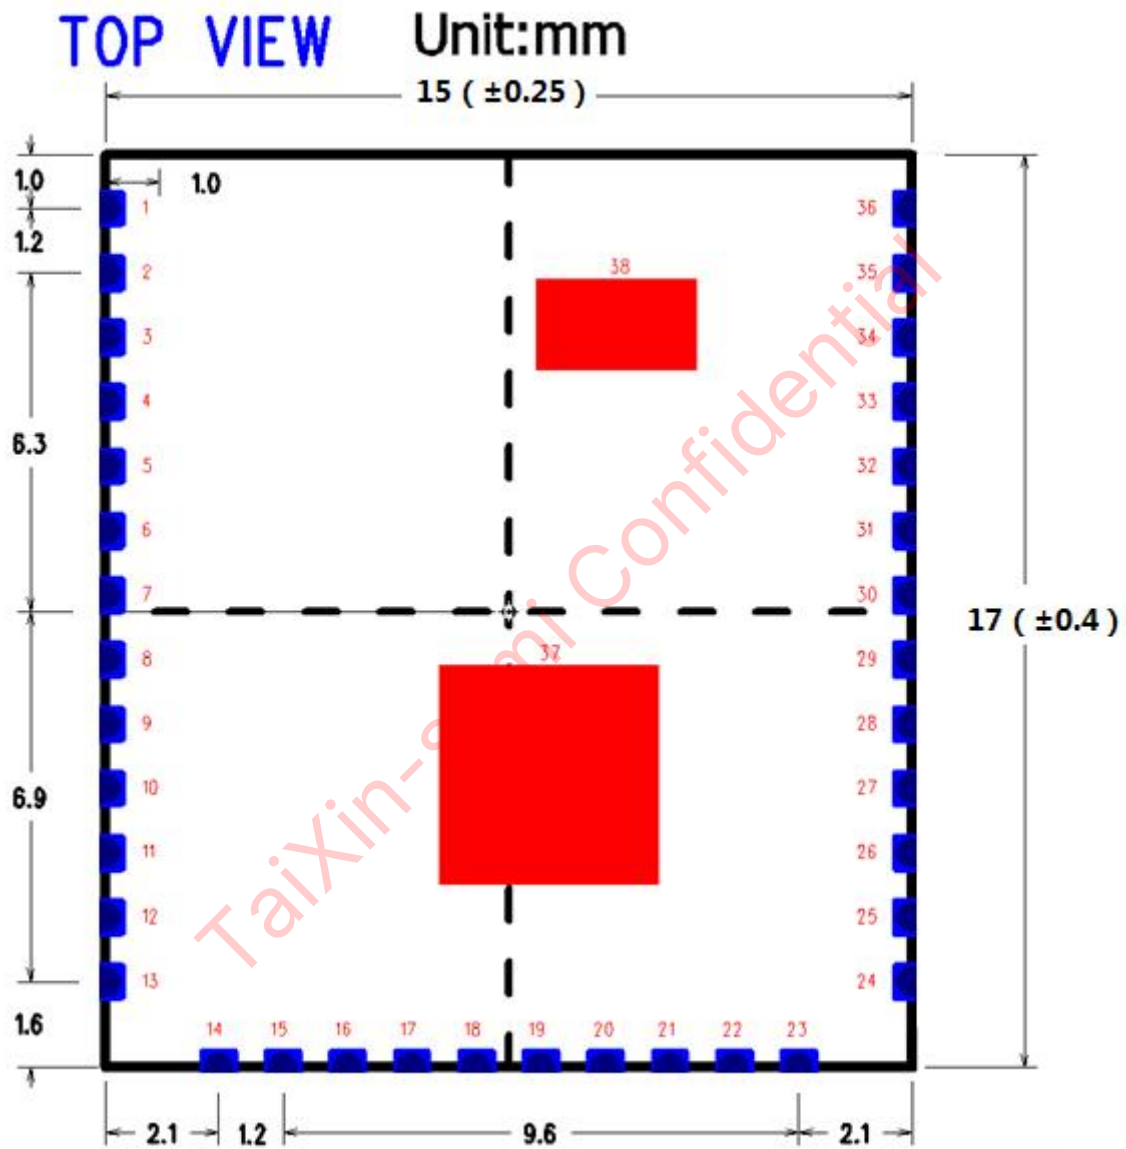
TX-AH-Rx00Pxx Module Top View
